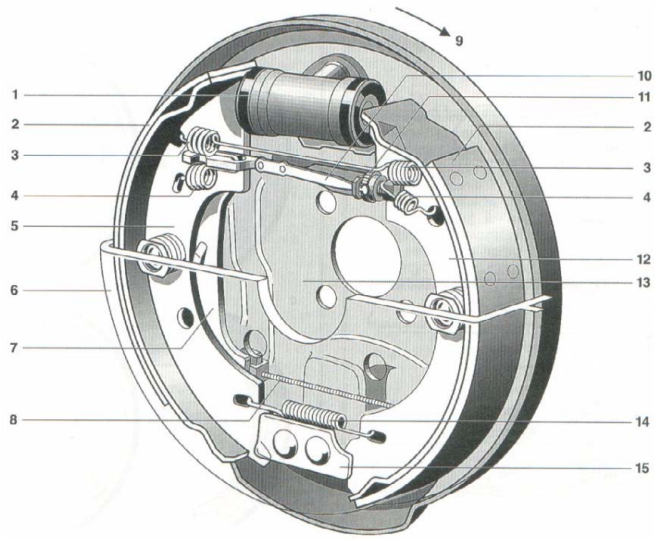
Elements of a drum brake: 1 – hydraulic cylinder, 2 – friction lining, 3 – spring, 4 – regulation mechanism spring, 5 – brake shoe (backward), 6 – brake drum, 7 – emergency brake lever, 8 - emergency brake linkage, 9 – drum direction of rotation, 10 – regulation mechanism thermal element, 11 – regulation nut, 12 brake shoe (concurrent), 13 – carrier, 14 – spring, 15 – brake shoe support [2]
